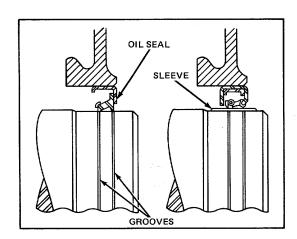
Use of rear Oil Seal Sleeve on Grooved Crankshaft
